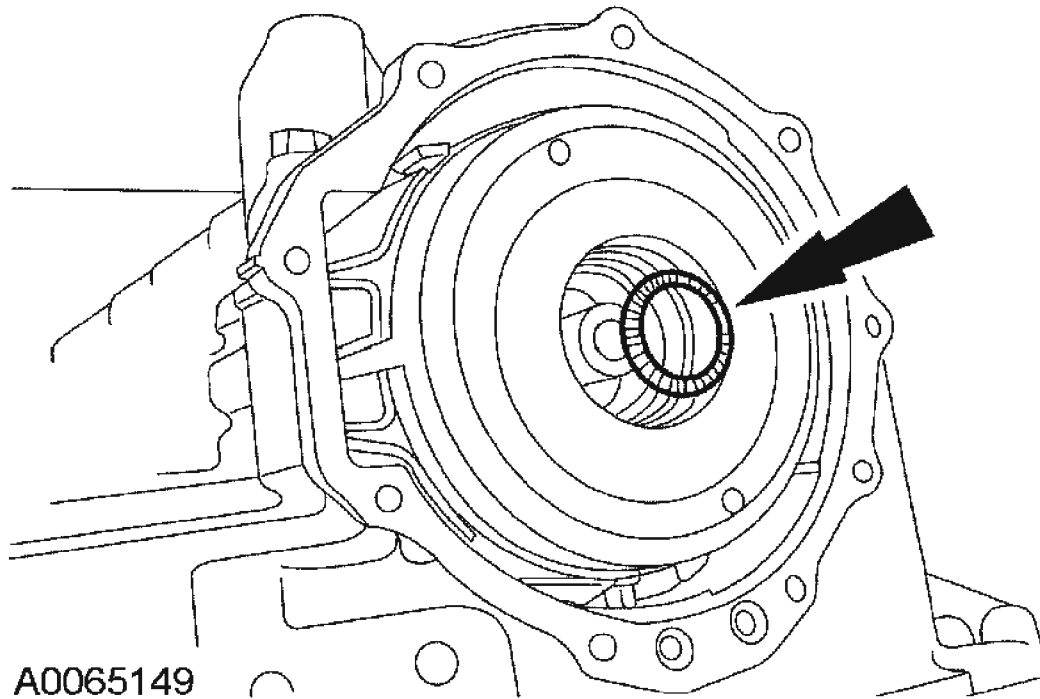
Installing Direct Clutch Cylinder Thrust Bearing
